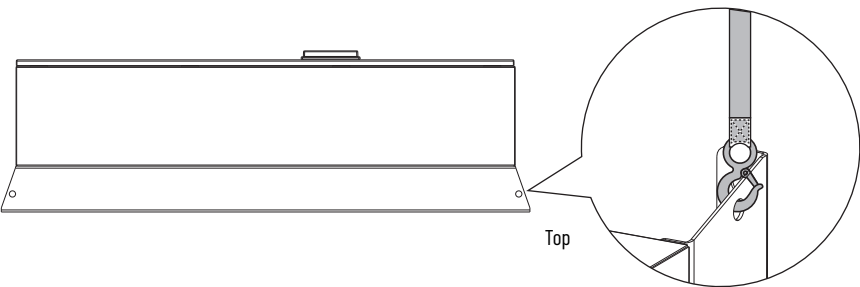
Wall Mount Frame 7 Lifting Points - Eight Places
